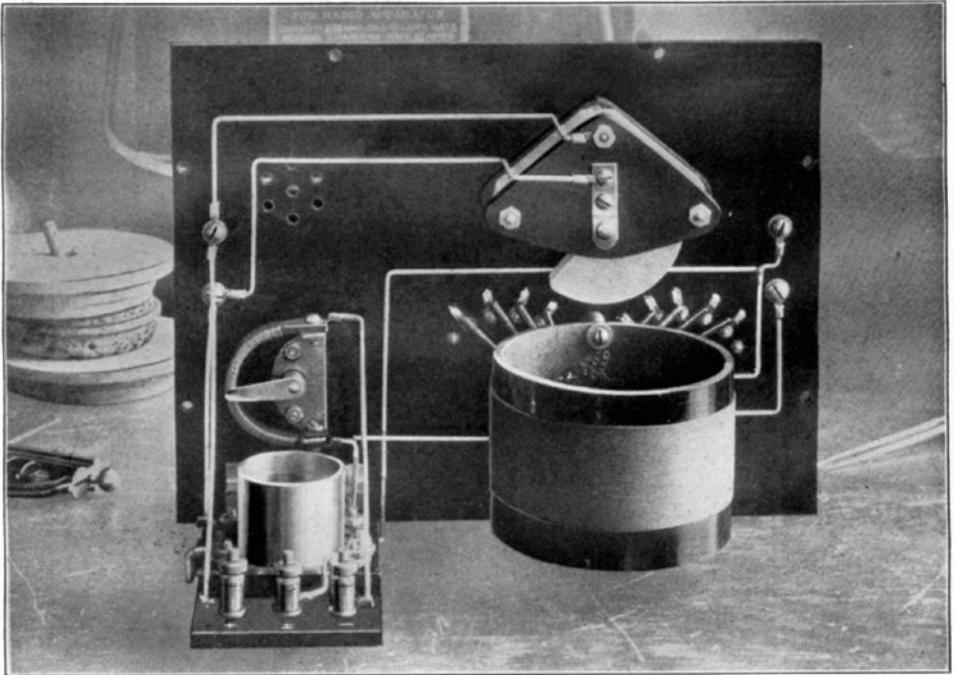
The rear view shows the wiring clearly. It is sometimes helpful to compare the arrangement with your own work when you are putting on the connections
